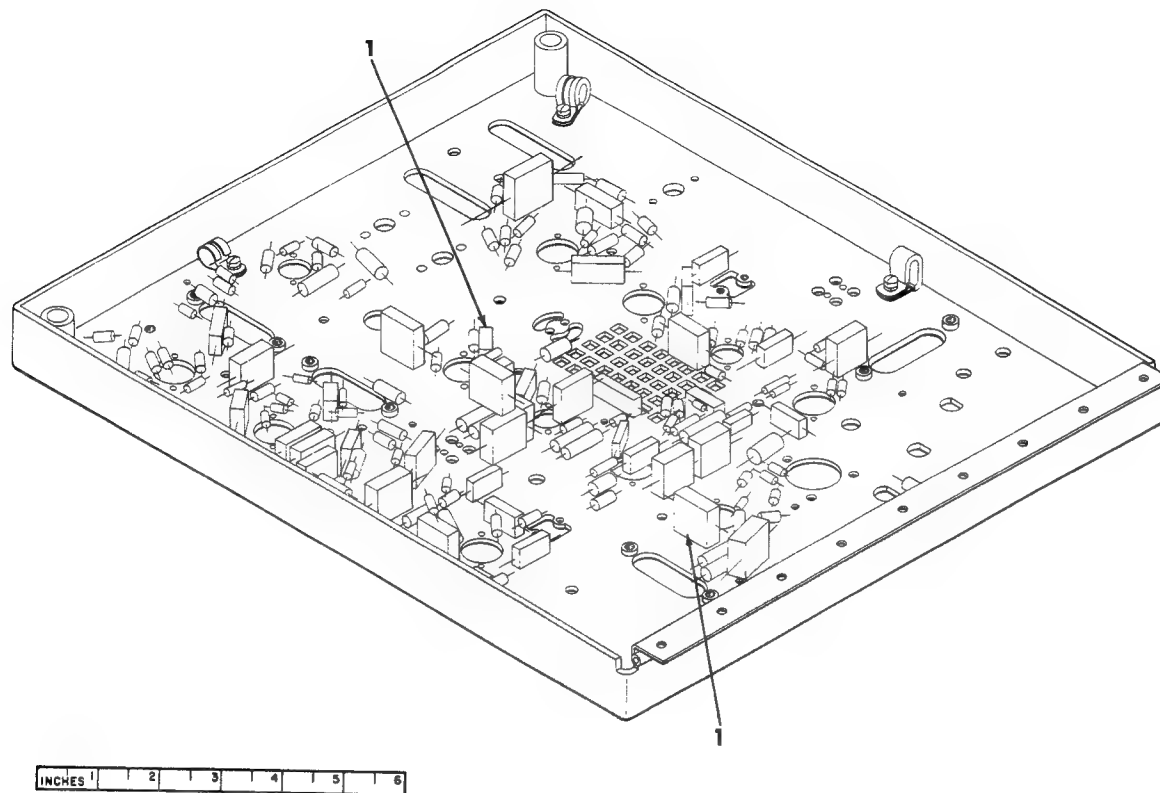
Amplifier, trigger (9139862)—partial exploded view
